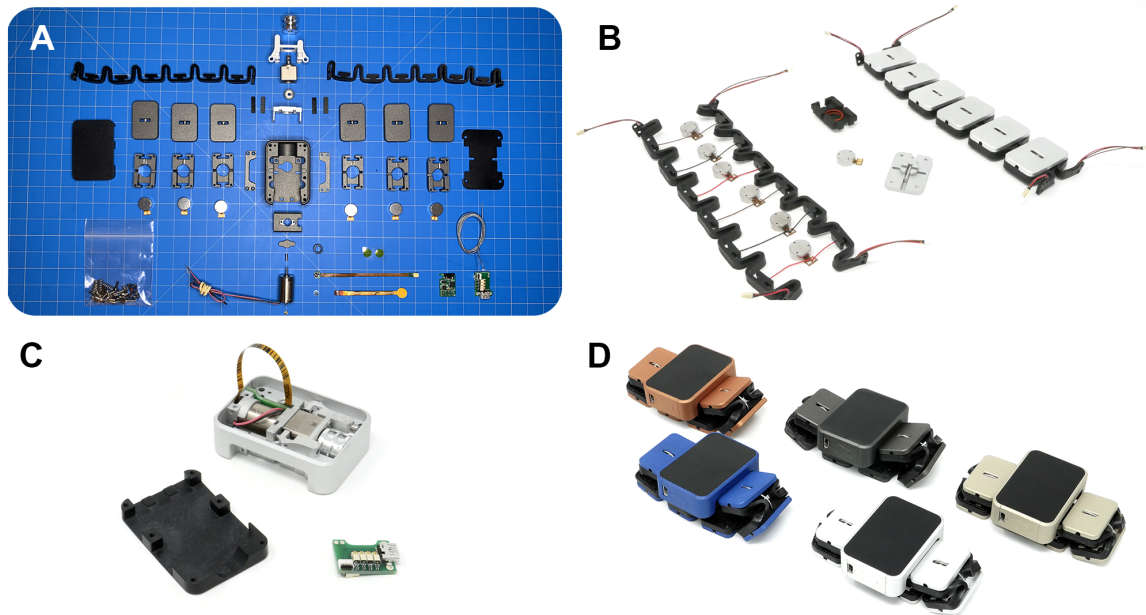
Tasbi fabrication. (a) Each Tasbi is comprised of over 150 parts that require hand assembly. (b) A vibrotactile band assembly before and after factor enclosure. (c) A tensioner housing assembly before enclosure (d) Completed Tasbi v2.0 units. Eight units have been fabricated for internal uses and to share with collaborators.
